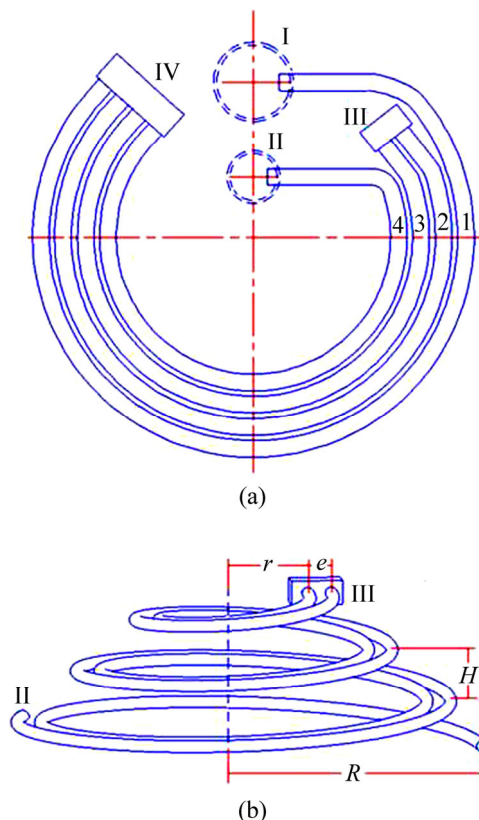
Structures of two elastic tube bundles: (a) Planar elastic tube bundle; (b) Conical spiral tube bundle
